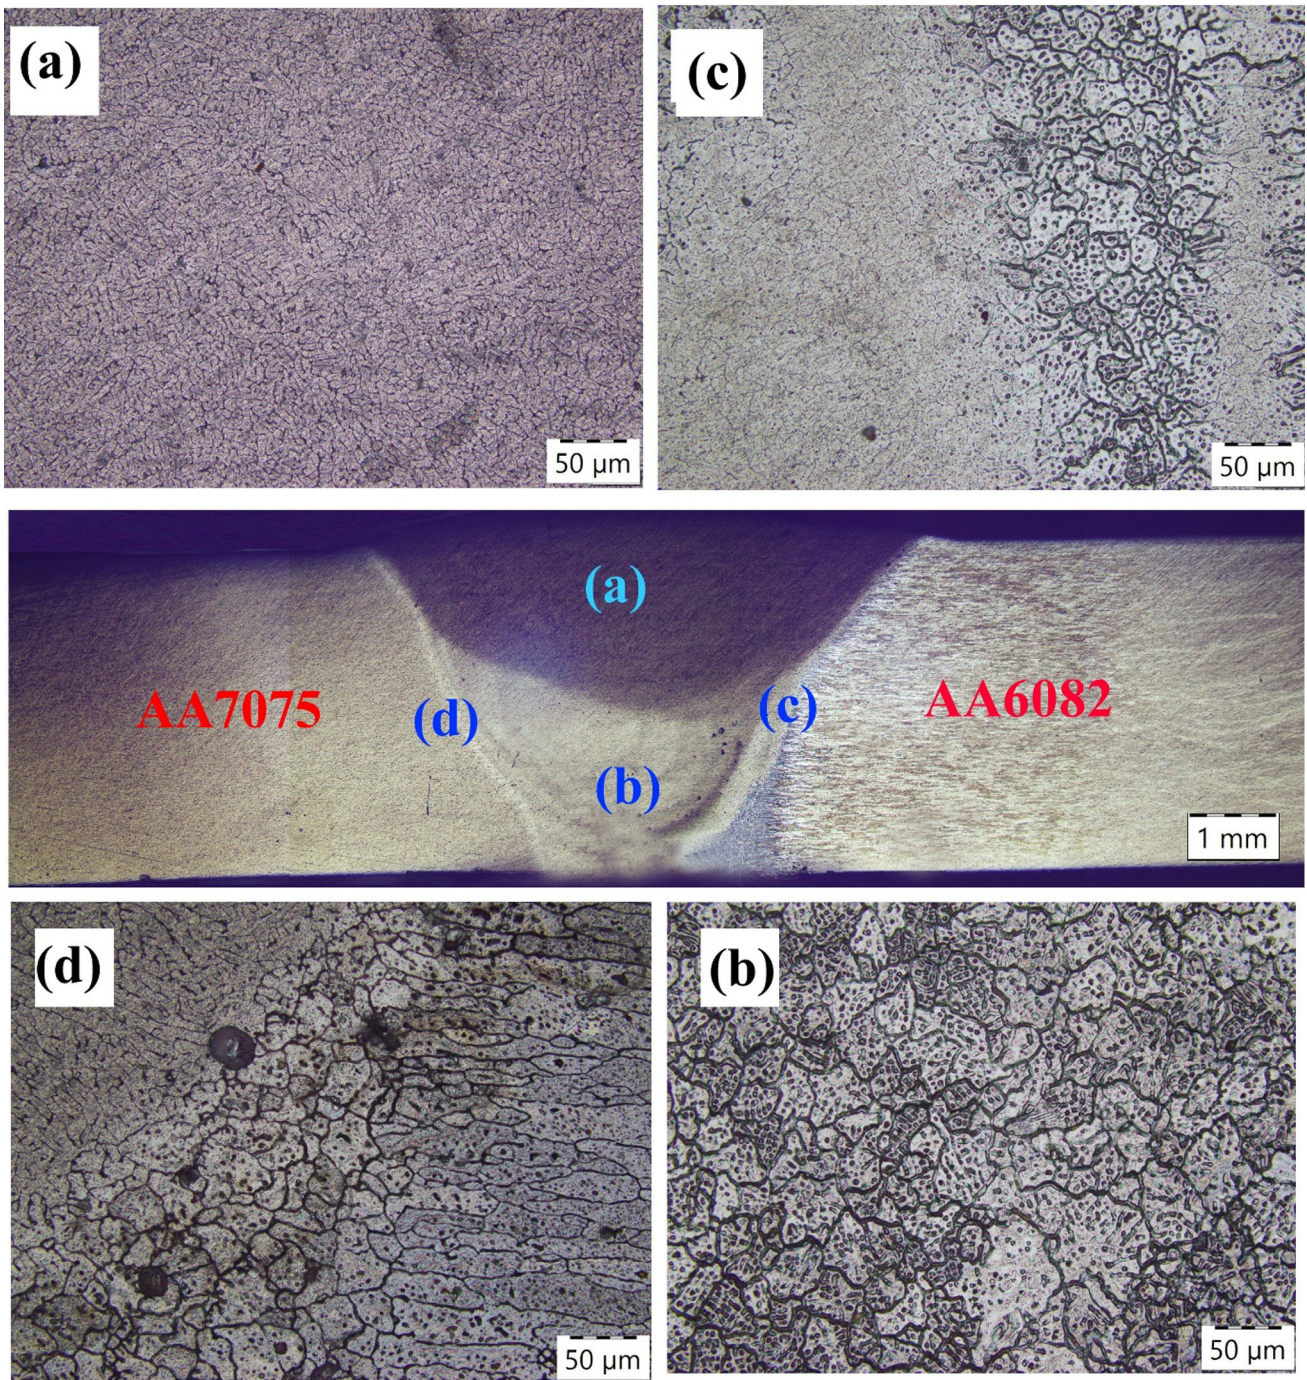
Microstructure of dissimilar welded joint a, b weld zone, c, d HAZ of AA6082 and AA7075
